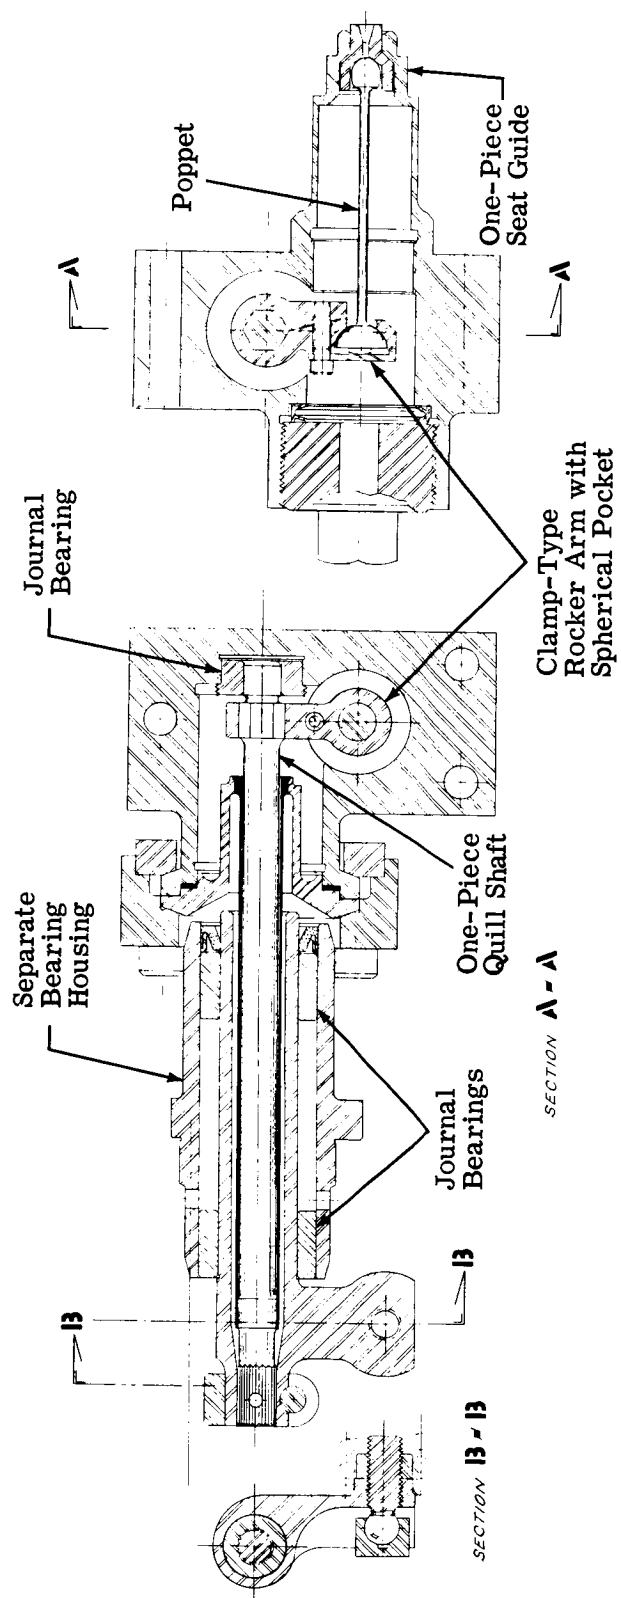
Section Views of Final Oxygen Injector Assembly
